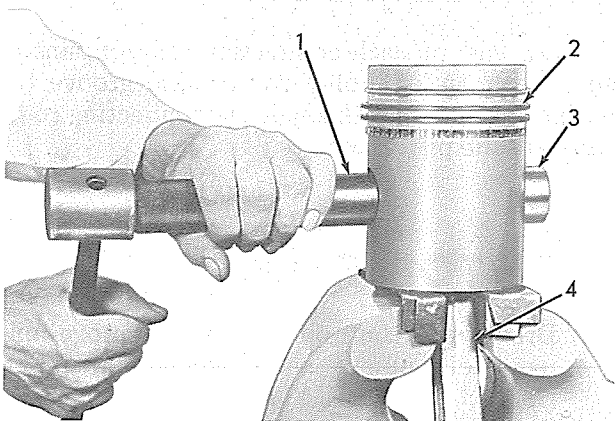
Removing Piston Pin From Piston (T-27631)
